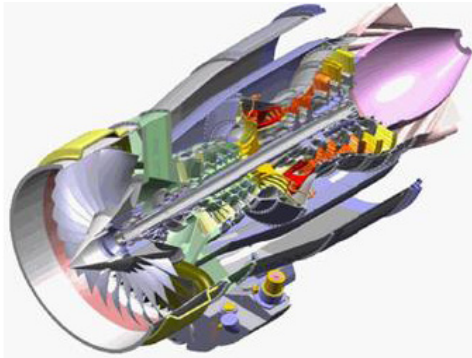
Cutaway drawing of Honeywell's Tech7000 engine.
